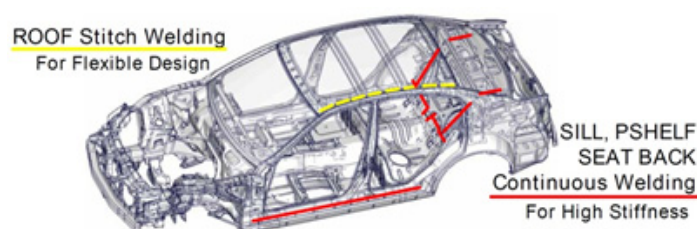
Laser welds in SKYLINE²¹⁾.
